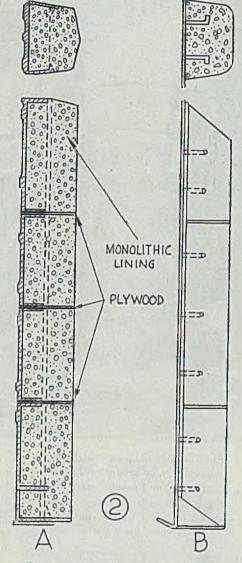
(A) Coke oven door with cast-iron lining retainers. (B) Coke oven door of fabricated steel with hook lining retainers
